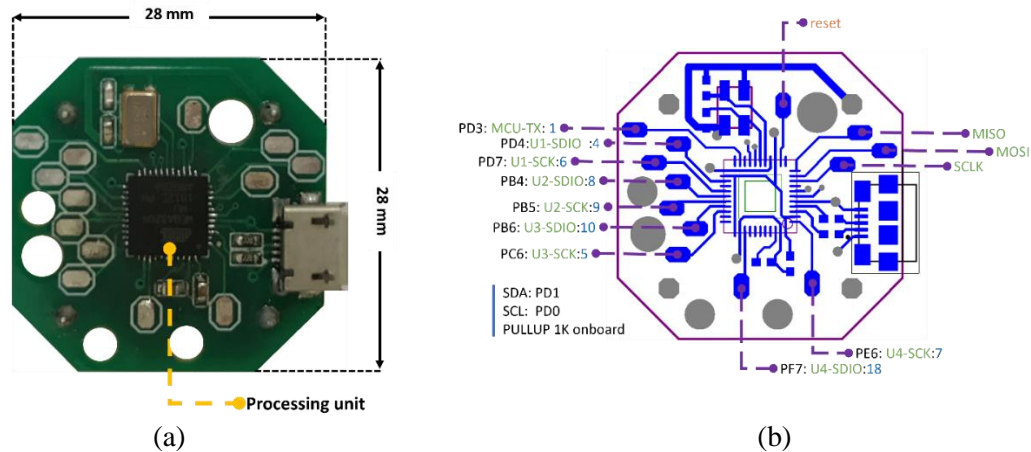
a) PCB layout and its dimension b) pinout for microcontroller unit
